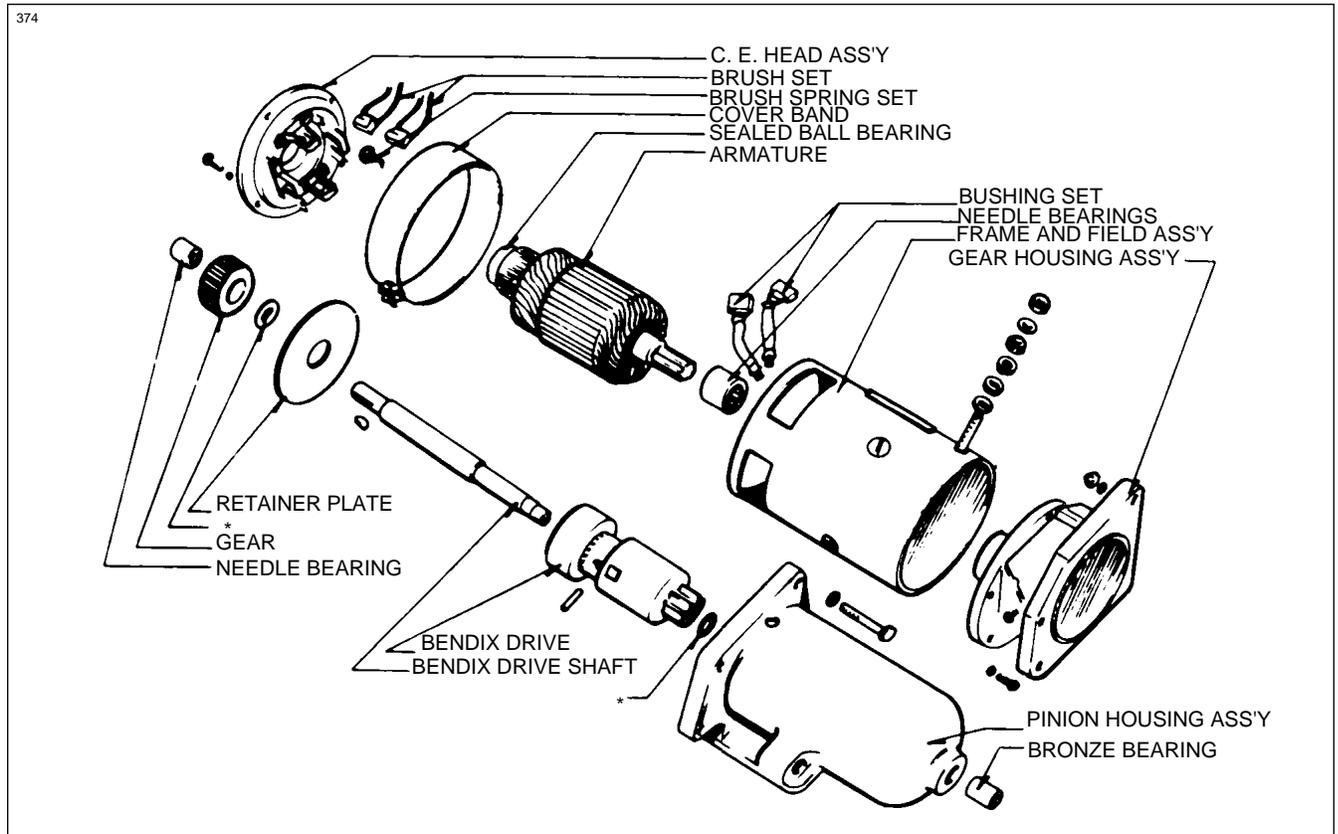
Exploded View of Gear Reduction Starter Motor
